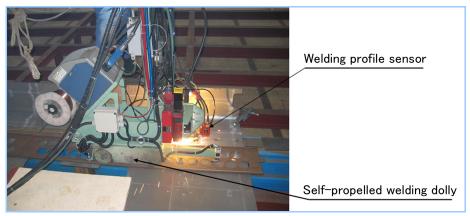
Appearance of the dolly used for hybrid laser-arc welding
